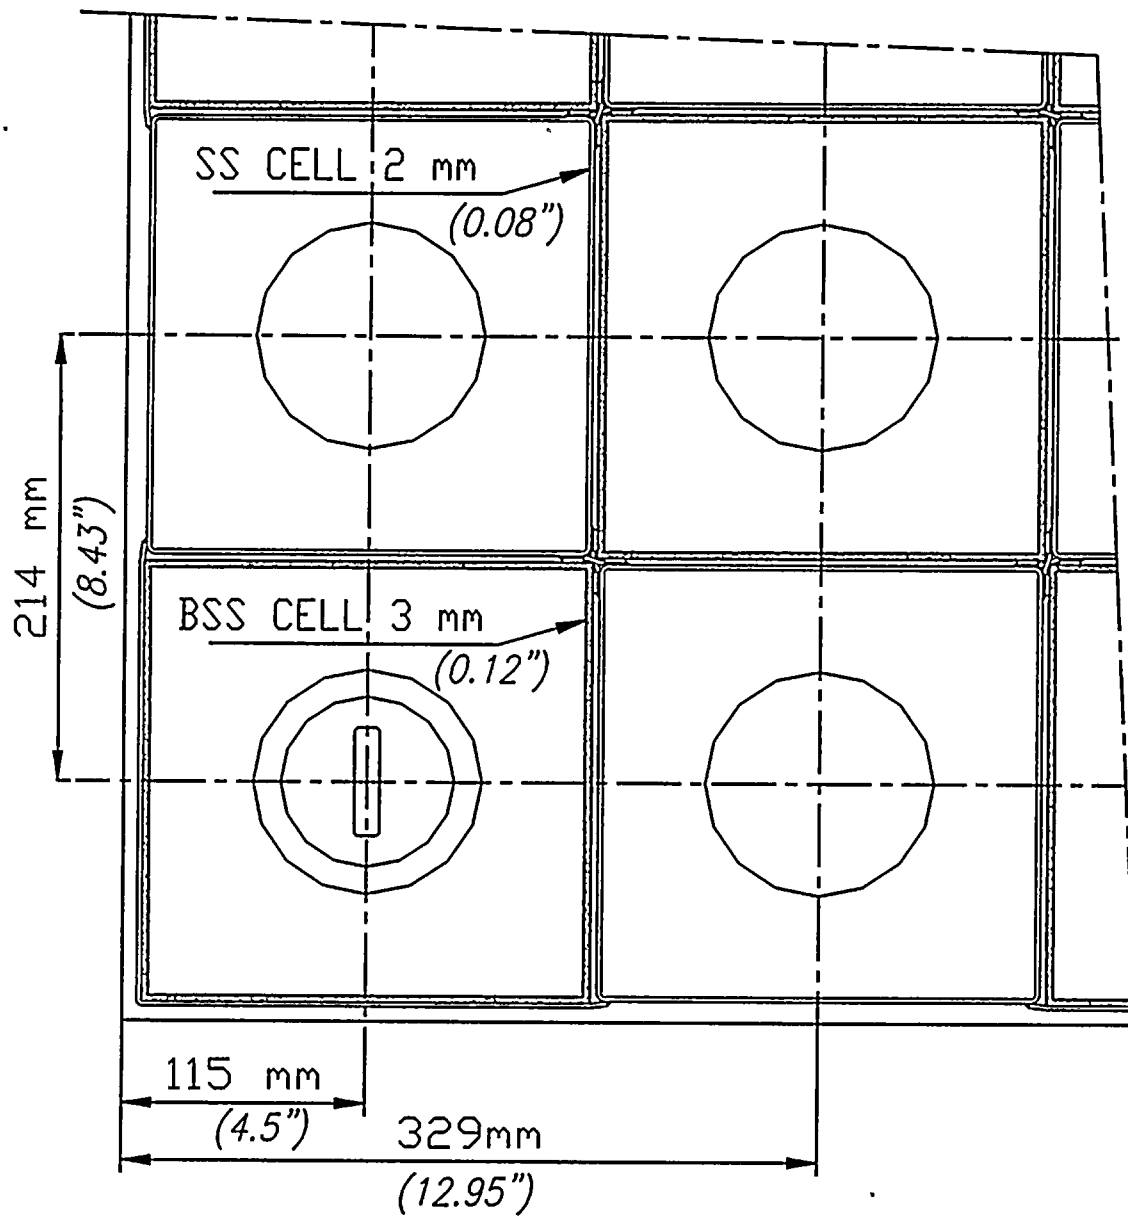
Type 2 Rack - Detail of Connecting Tabs
